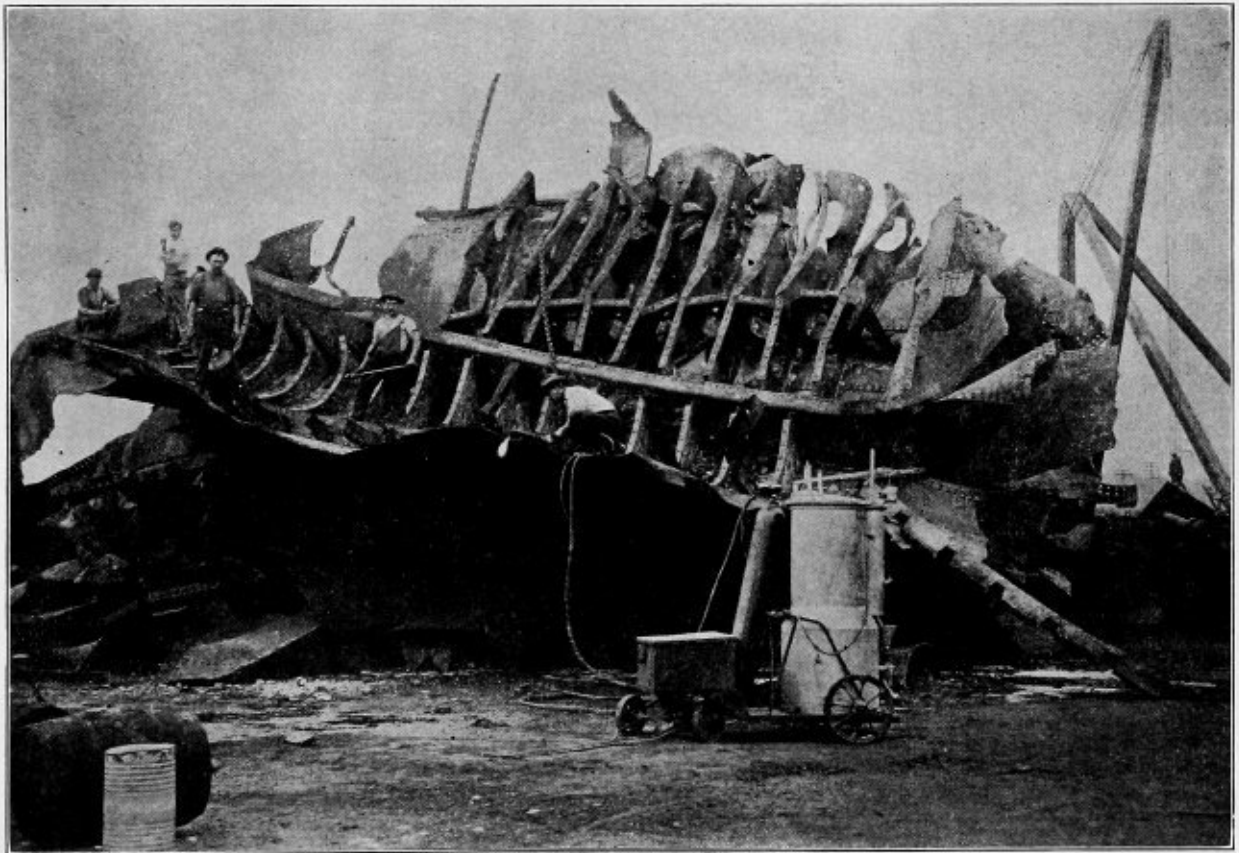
Torch Operator Cutting Apart Bottom Plating of Wrecked Vessel
